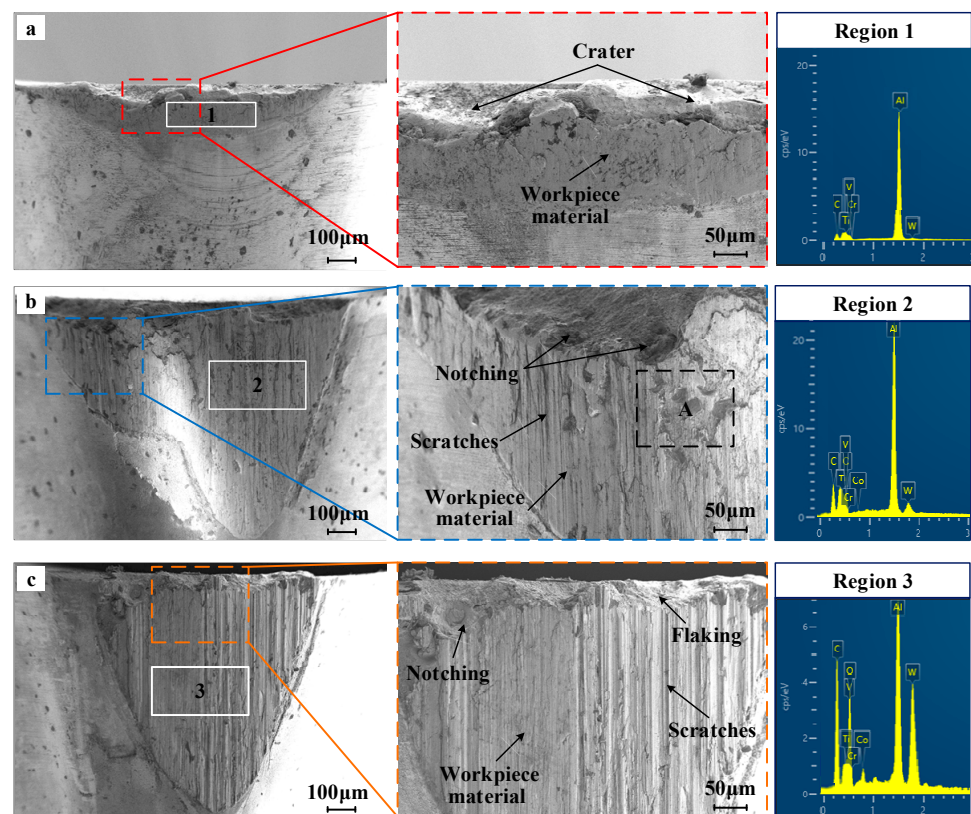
The flank wear morphology and EDS analysis under dry conditions. (a) $v_c = 60$ m/min; (b) $v_c = 120$ m/min; (c) $v_c = 180$ m/min.
